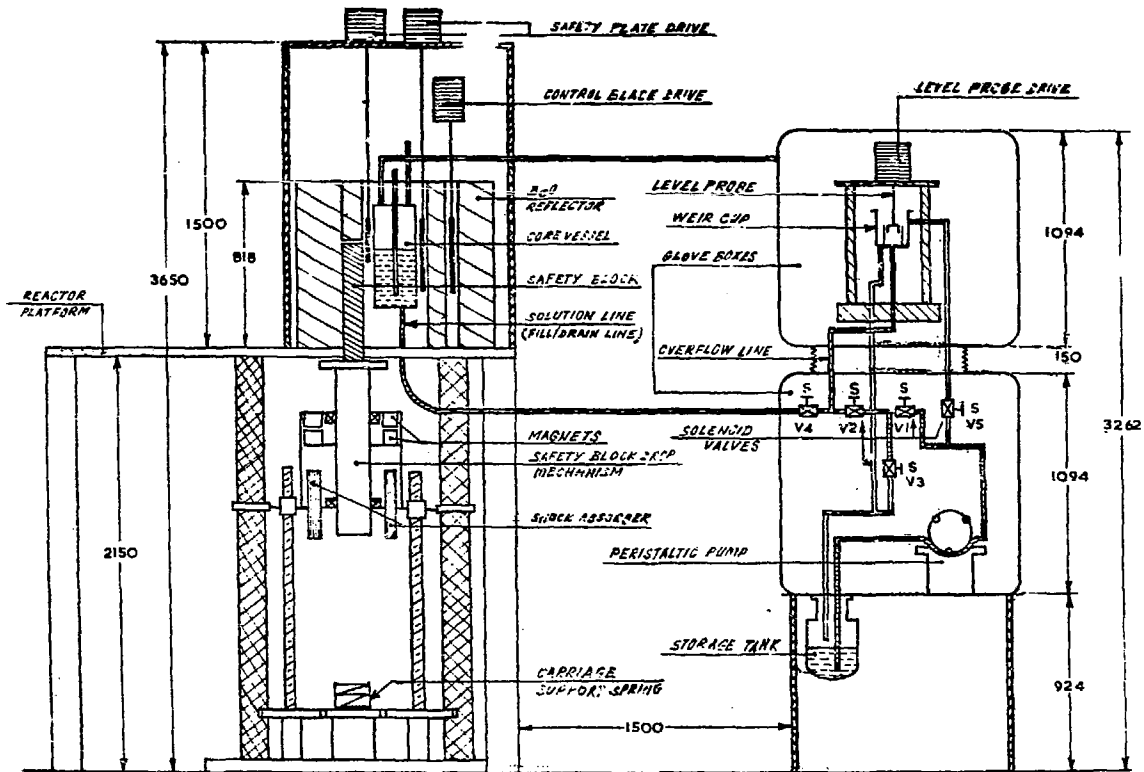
Layout of reactor assembly and glove boxes: schematic elevation (dimensions in mm)
